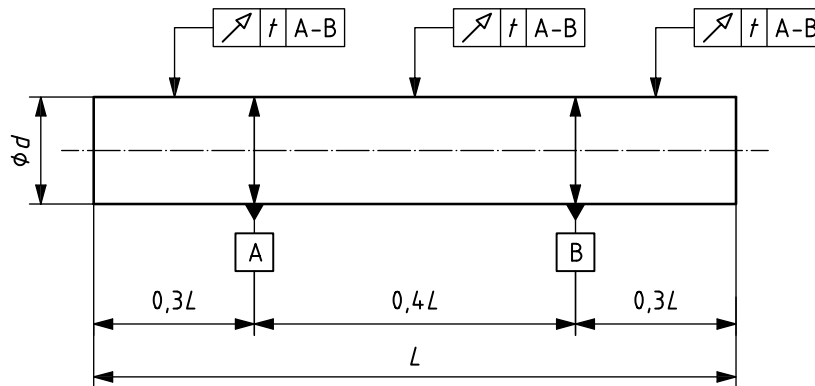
Solid and tubular shafts for series 1 and 3 sleeve type linear ball bearings
